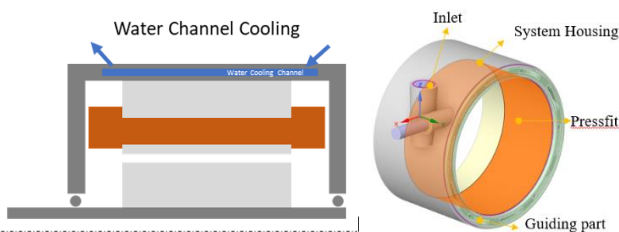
Motor with Water Channel, Dry Rotor Cooling Technique
